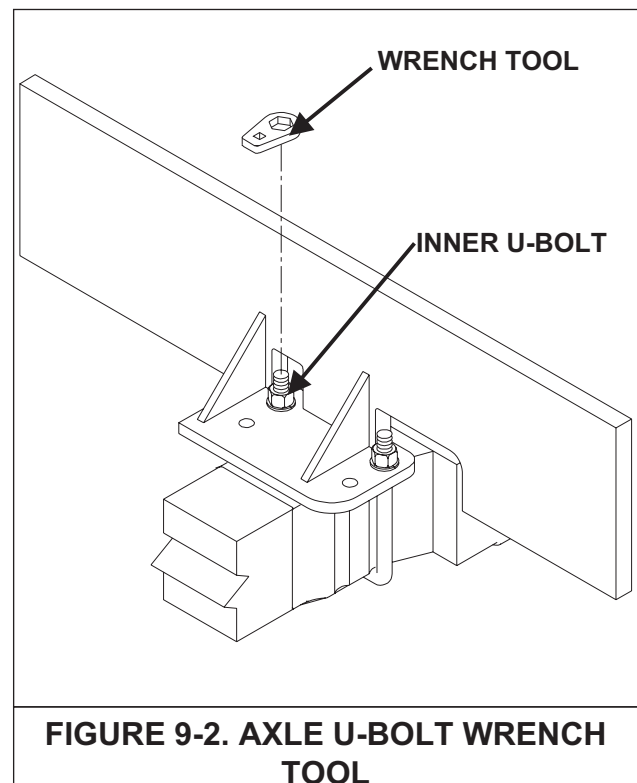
AXLE U-BOLT WRENCH TOOL
